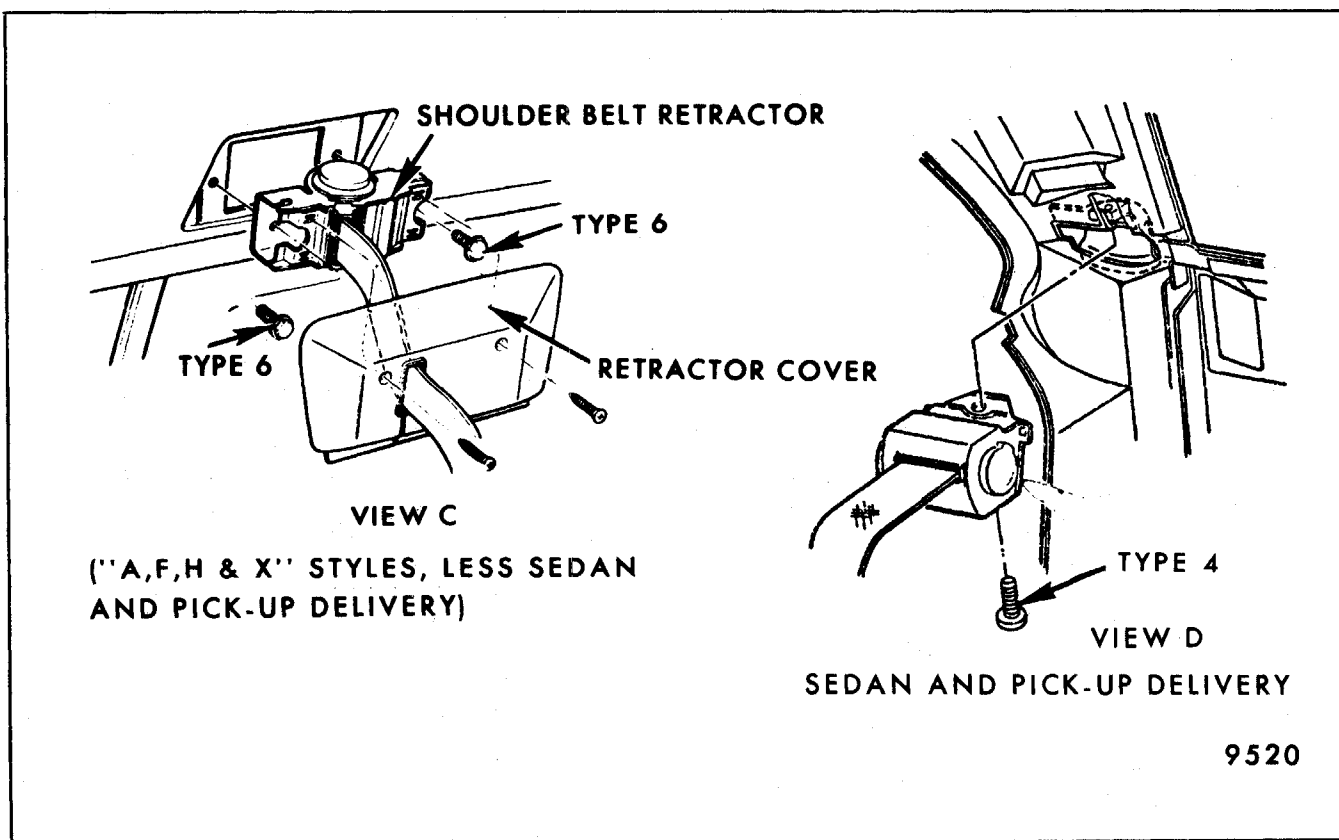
Front Seat Shoulder Belts - "A,F,H and X" Styles
